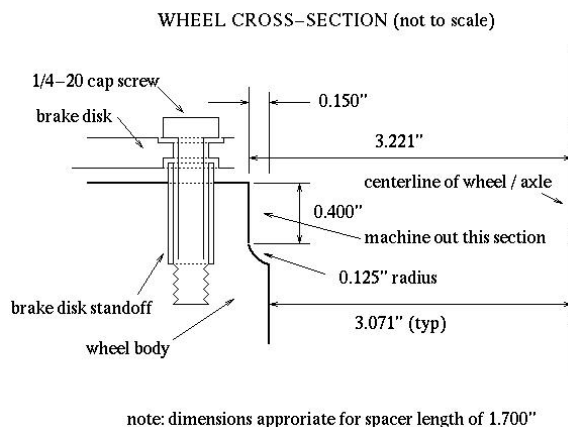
Sketch showing dimensions for machining the wheel rims from early production runs.
